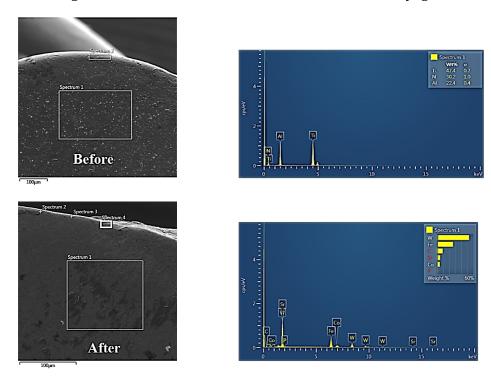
EDX analysis of coating layer on cutting tool used in dry machining
